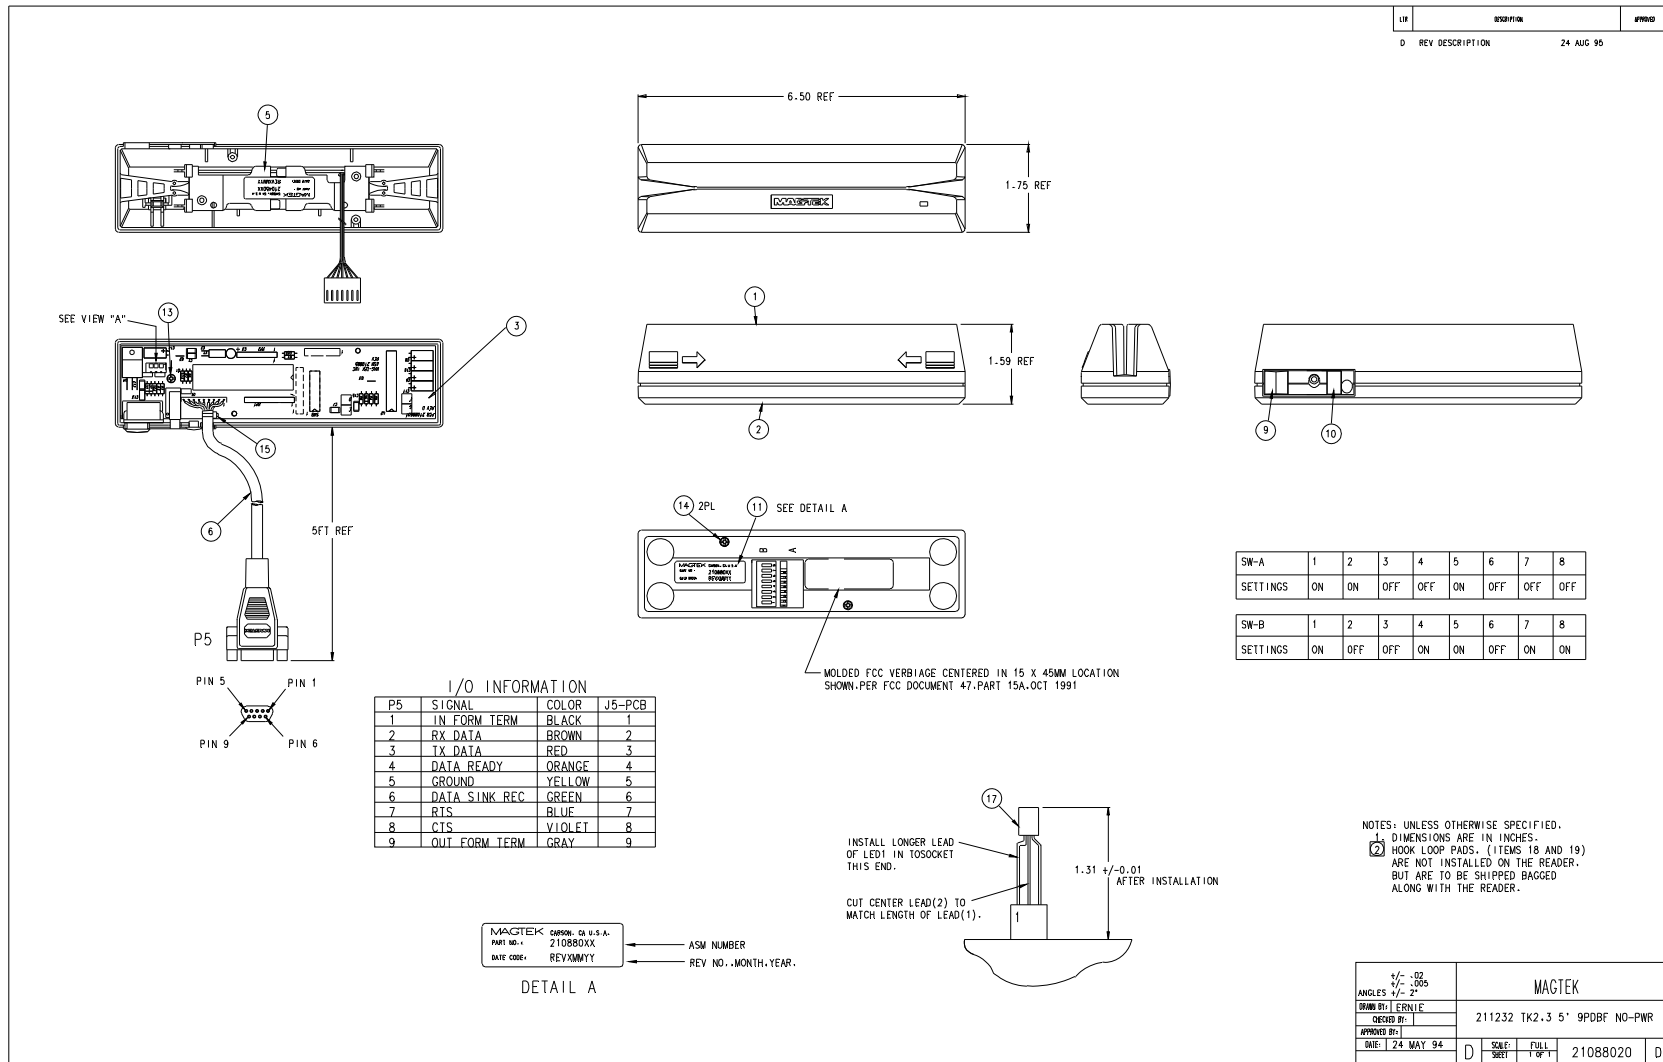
MT-211232 Top Assembly Drawing - Without Power Supply
